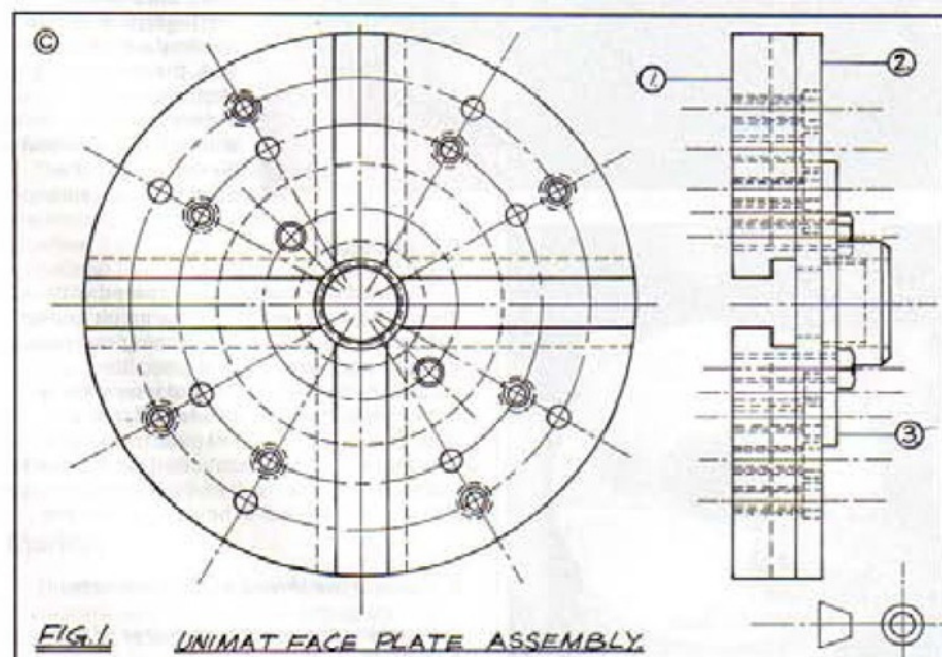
UNIMAT FACE PLATE ASSEMBLY.
